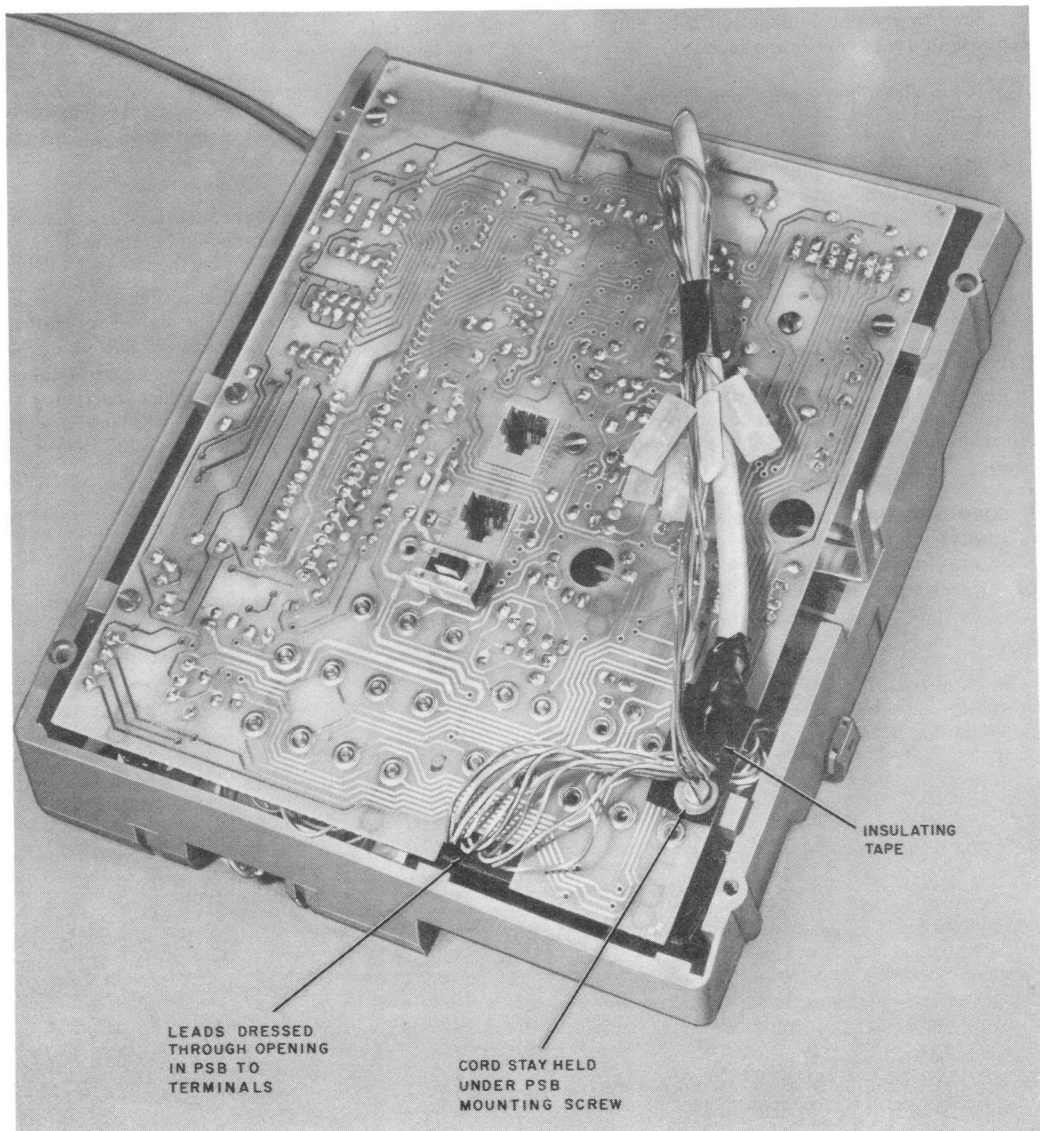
Bottom of Set With Lower Housing Removed Showing an Adjunct Cord Dressed Across Power Supply Board (PSB)
